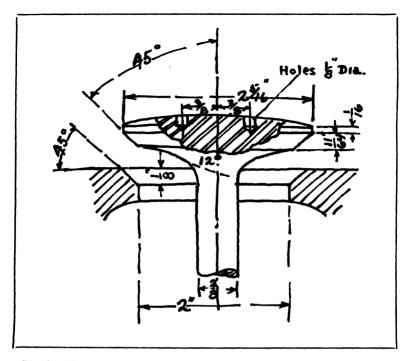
Sketch of a Poppet Valve Drawn in Ink with a Fountain Pen
